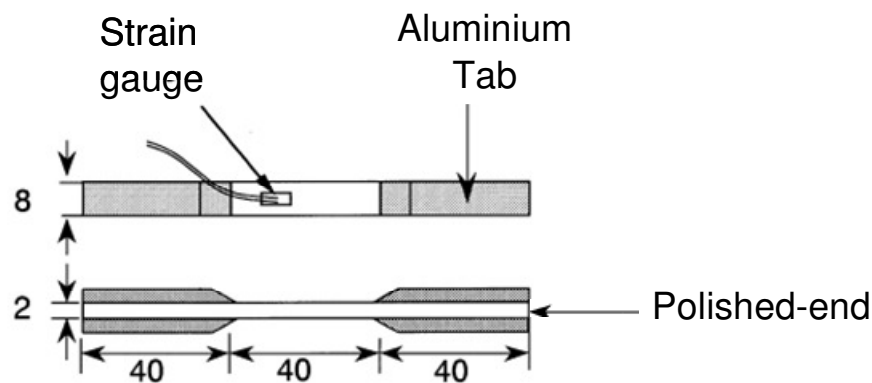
Schematic illustration of the test specimen and the polished-end with dimension in mm [97].
